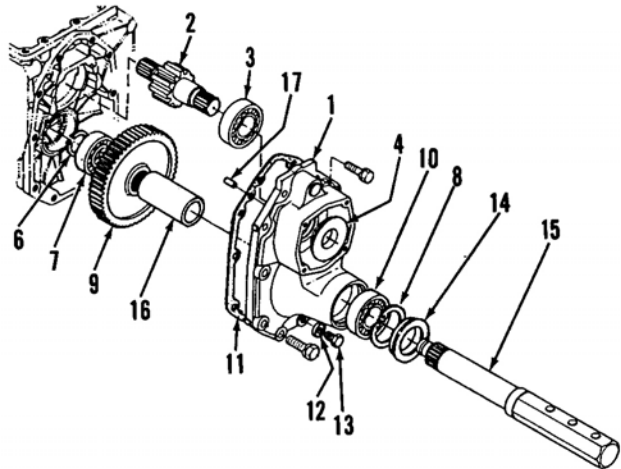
After removal of right axle case assembly, remove differential lock components as shown. For identification of parts refer to legend in Fig. 83.
